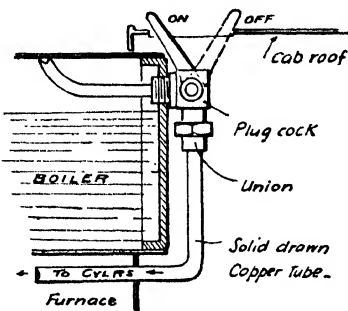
Simple Plug-cock Regulator on Back Plate.
